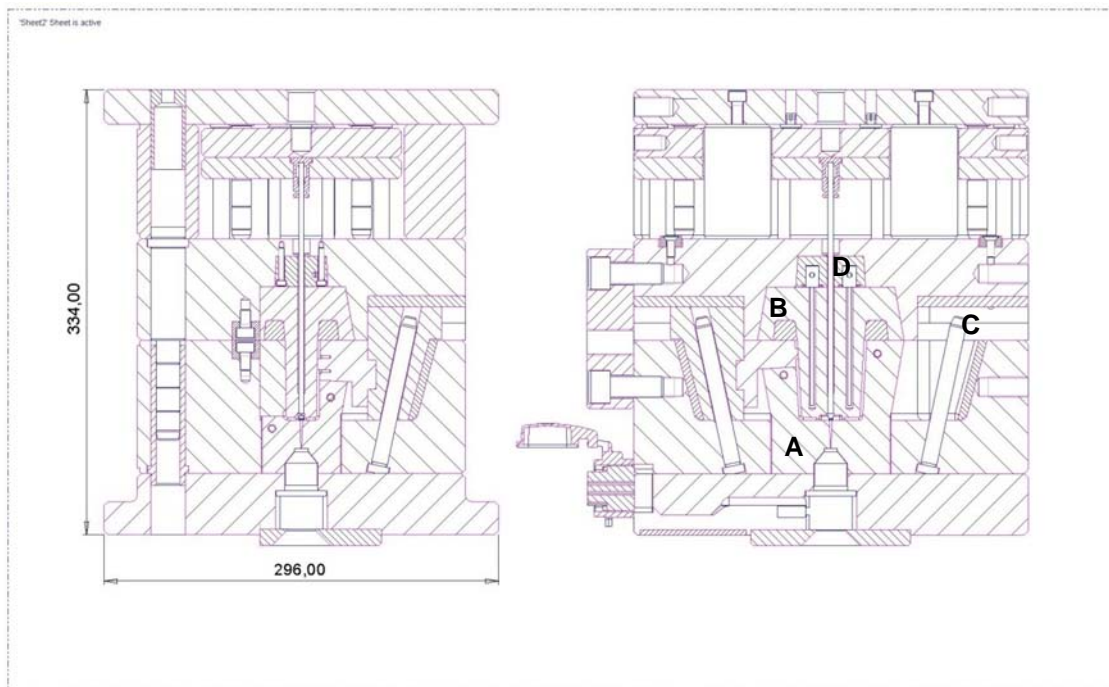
HM-2 assembly. A-cavity moulding block, B-core moulding block, C-lateral moulding element, D-cooling cassette fitted into the core
